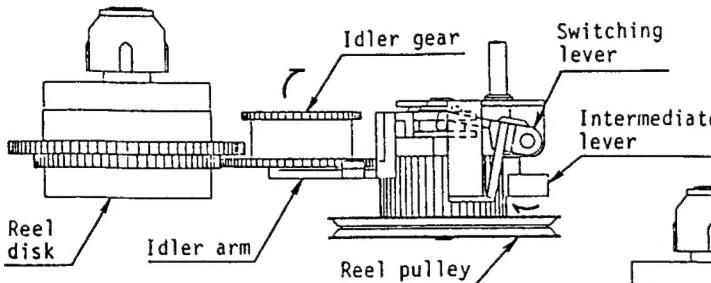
Gear Engagement in Fast Forward and Rewind Operations
